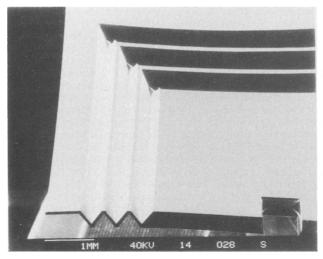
Mechanical bellow-element for pressure sensors assembly (REM)
